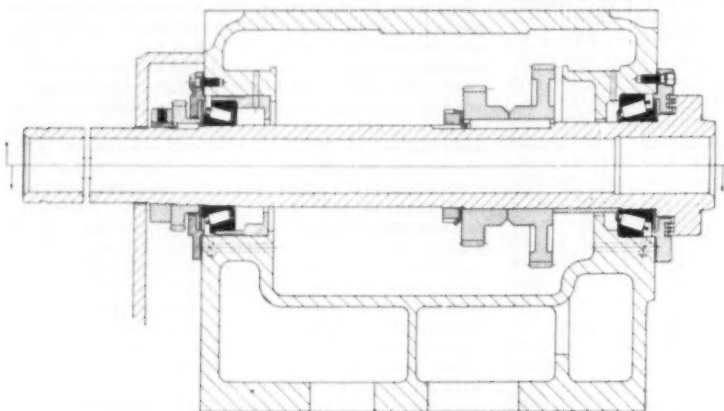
TYPICAL MOUNTING TO PERMIT THERMAL EXPANSION OF BEARINGS
